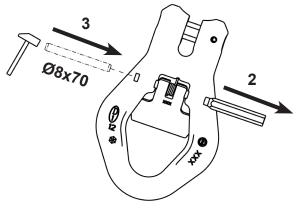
Fixing of the spring by utilizing a slotted spring pin
